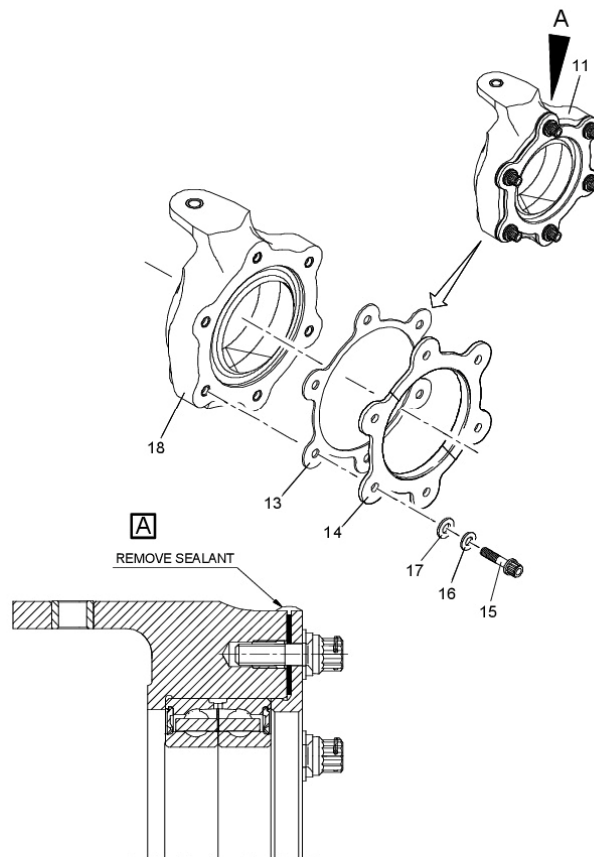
(sheet 1 of 4). Housing and slider group - Disassemble procedure (Sleeve assy P/N 109G6430A03)
